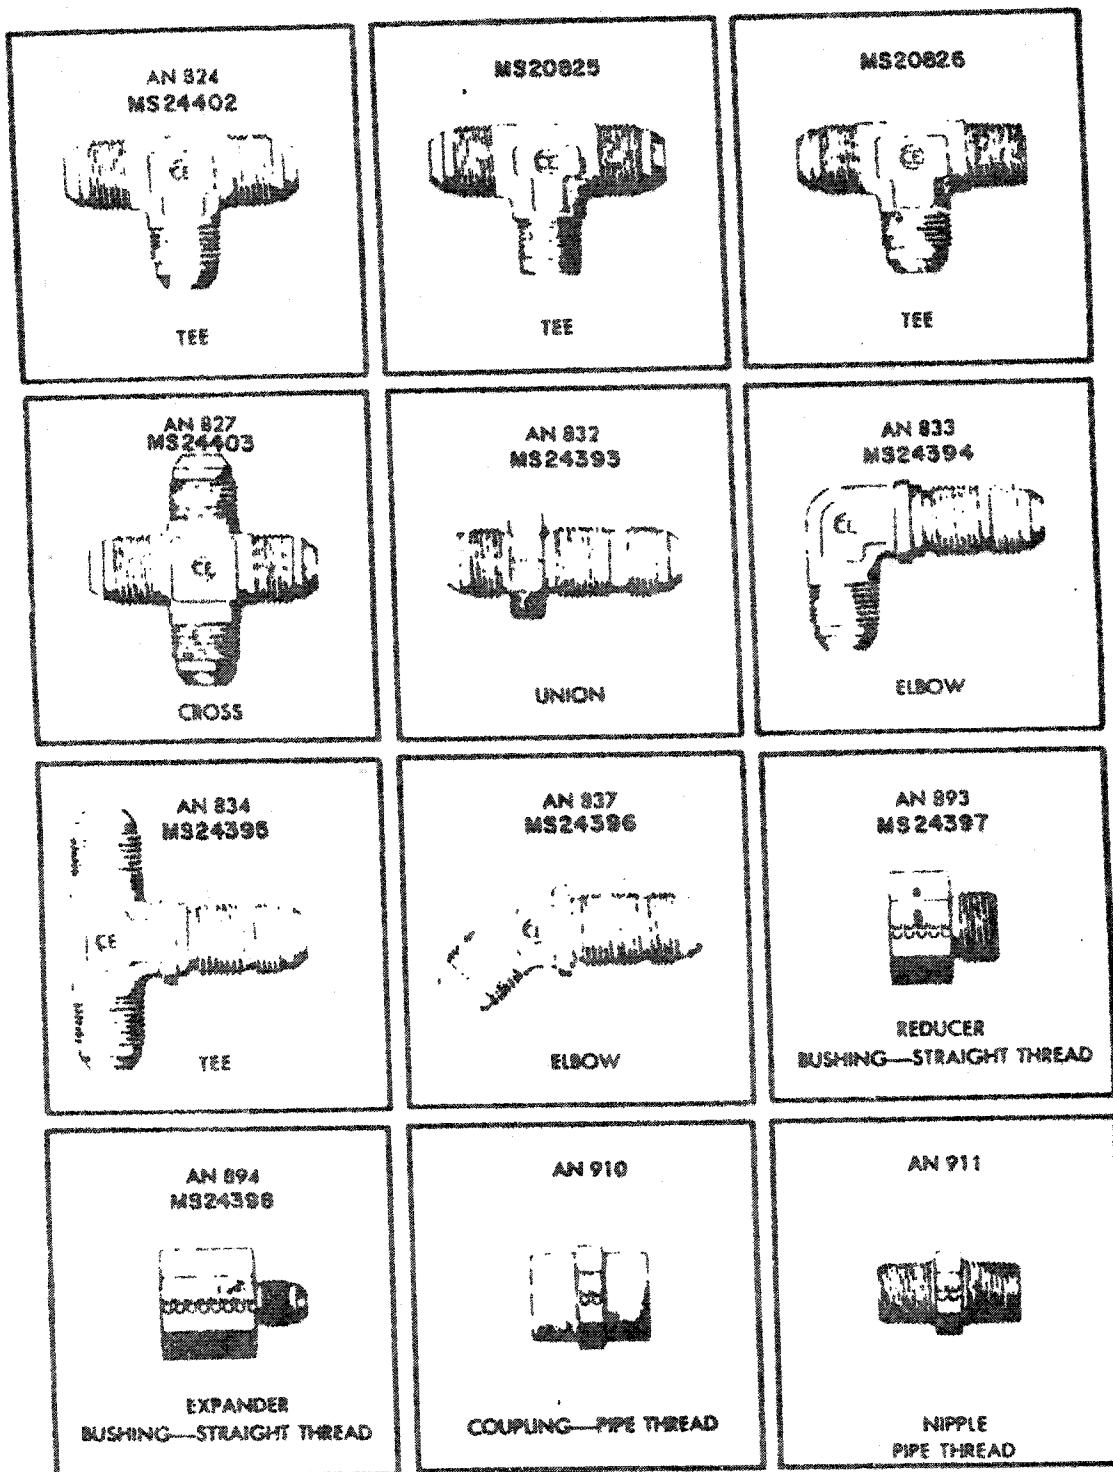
Tube Fittings (Sheet 2 of 4)
